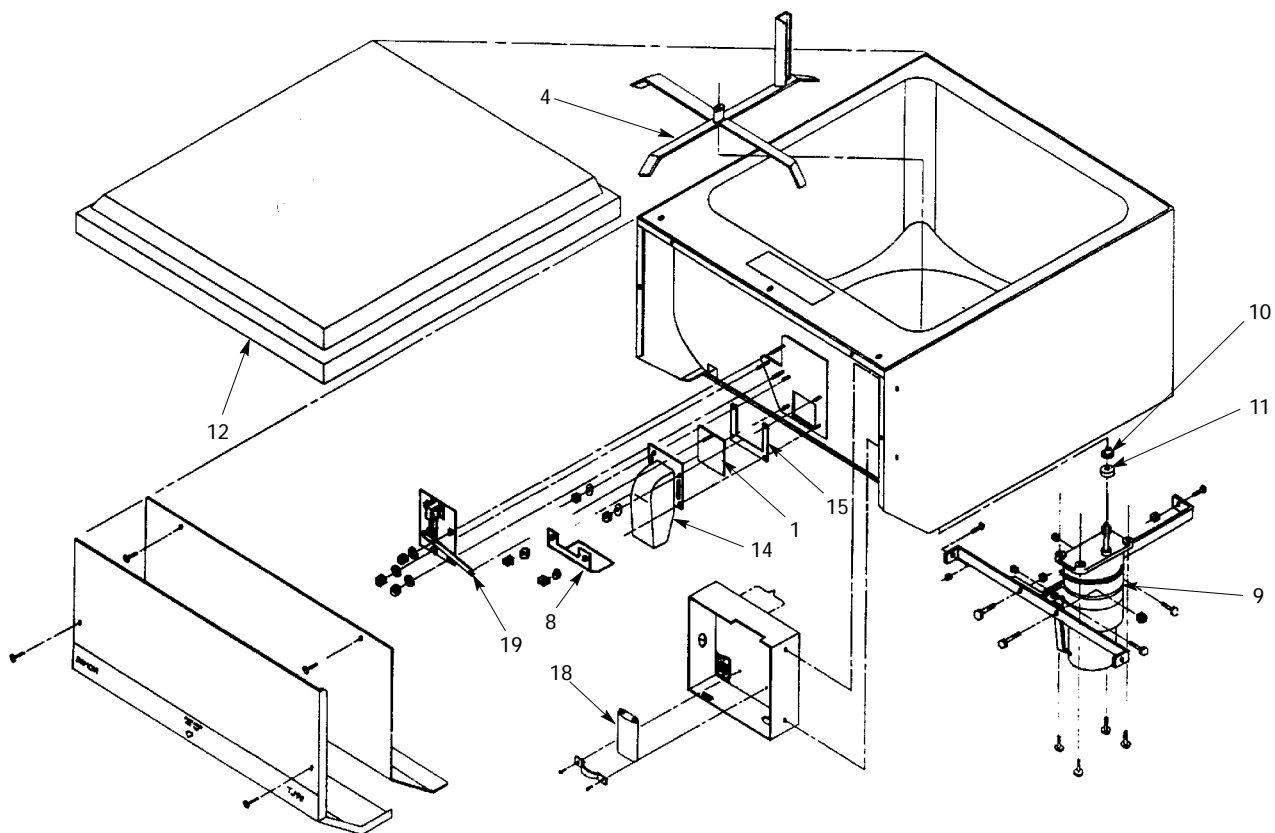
EXPLODED VIEW UPPER SECTION TJ90
